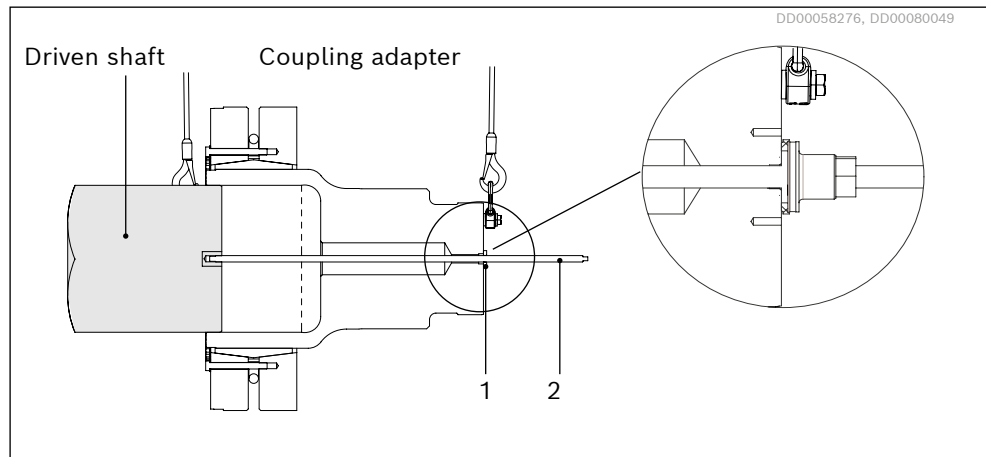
Mounting the coupling adapter on the driven shaft with the assembly tool.
